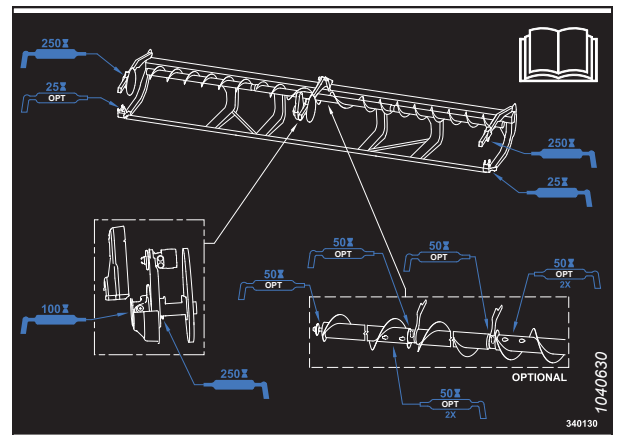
Decal for Double-Knife Header with Three-Piece Upper Cross Auger
